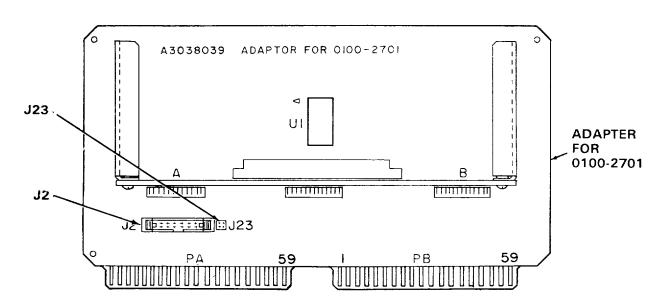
Cable Connection Points and Components Used During Panel Board Test (Sheet 1 of 2)
